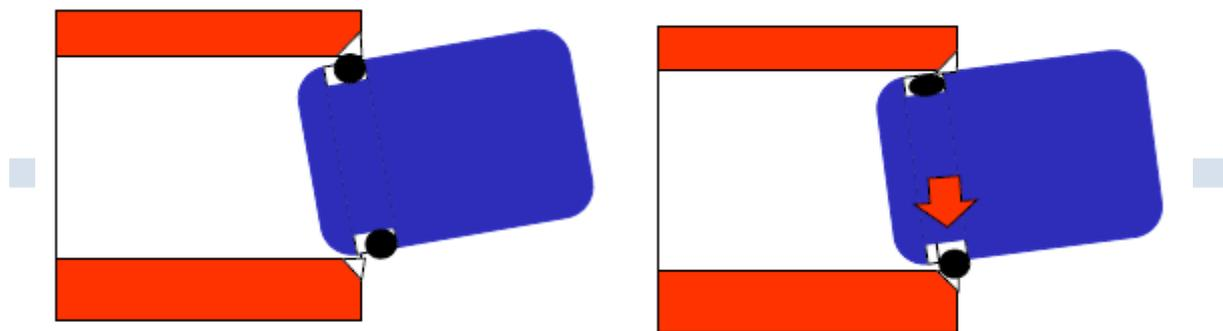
Incorrect mounting of a piston in a cylinder: The O-ring lifts off due to the tilting in the lower area and is sheared off (Photo: O-Ring Prüflabor Richter GmbH)
